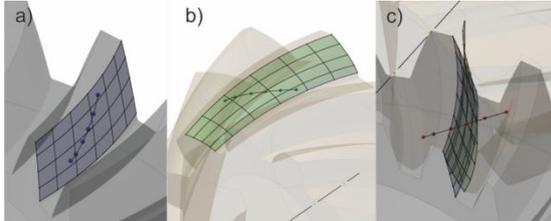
Results of motion simulation of a gear drive: a) contact path on a gear tooth flank b) contact path on a pinion tooth flank, c) line of action.
